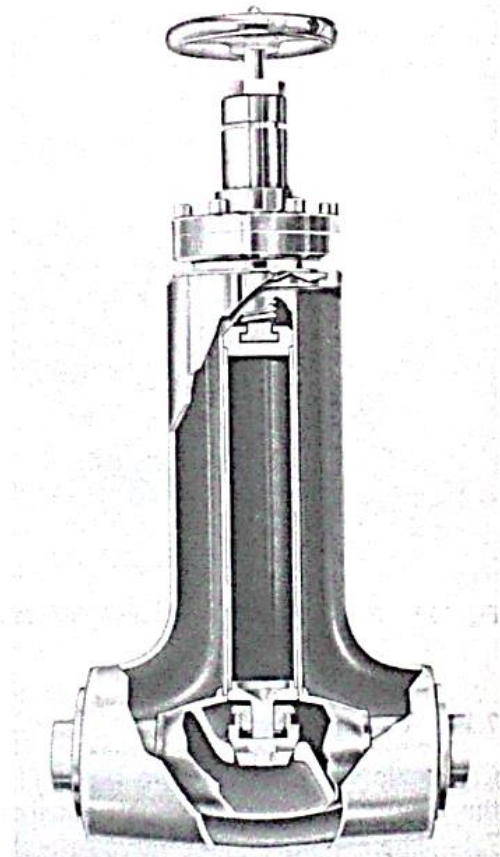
Vacuum-jacketed cryogenic valve (CVI Corp., Columbus, Ohio).
